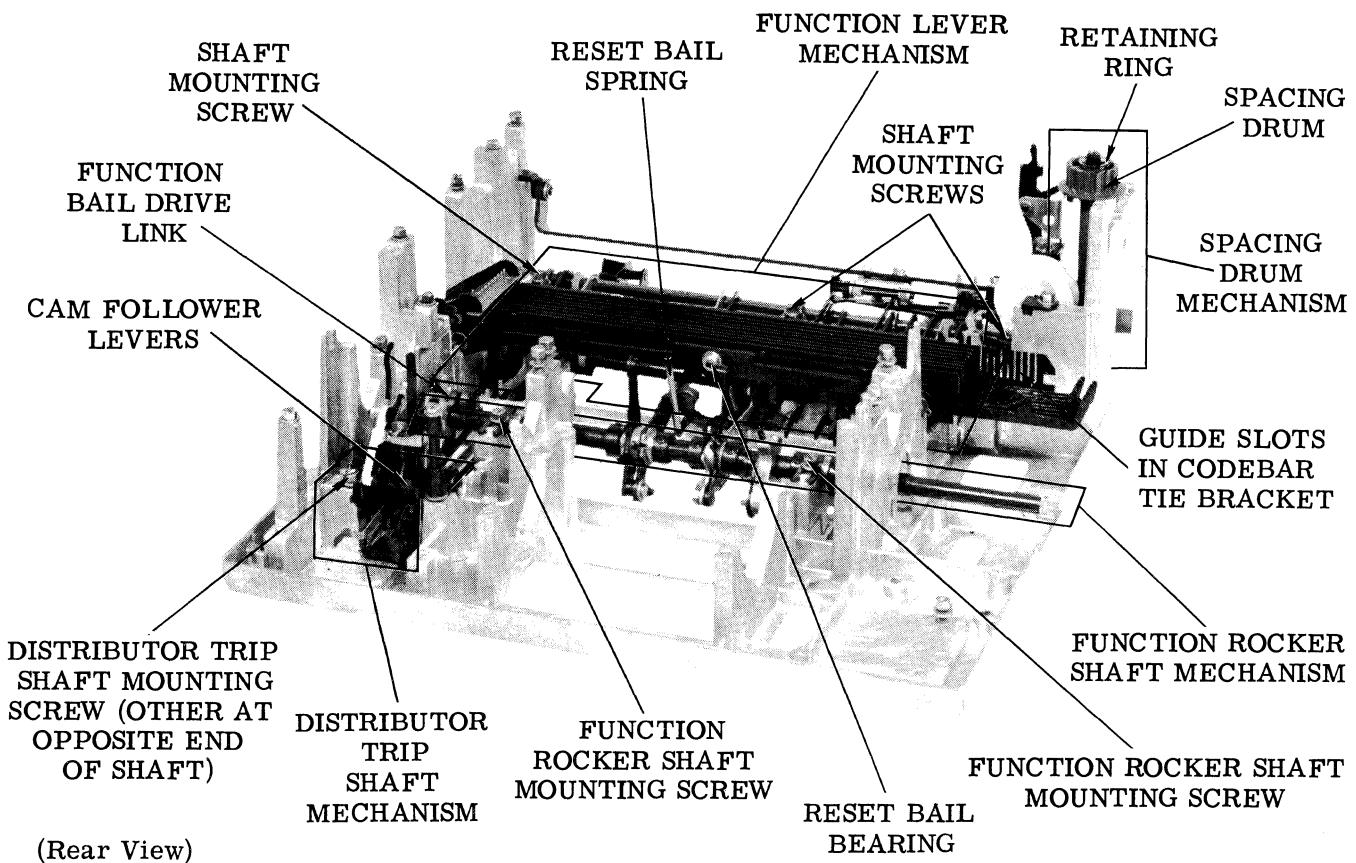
Typing Unit (A Number of Mechanisms Removed)
